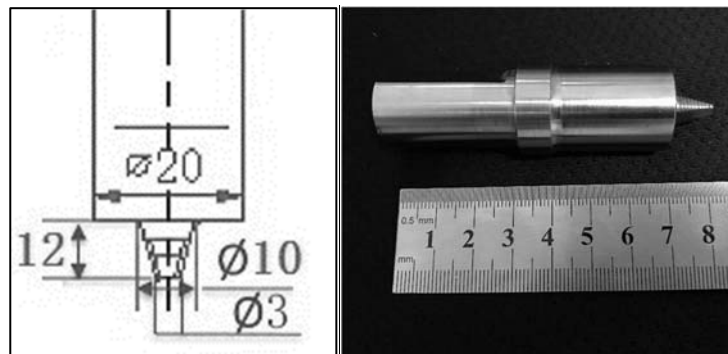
5 Sketch and photograph of the welding tool for FSLW
